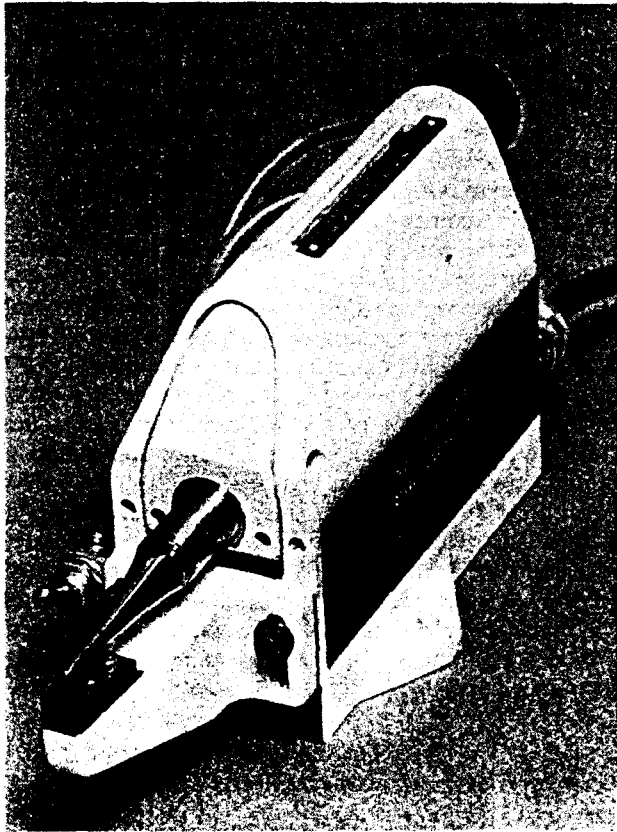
Typical 100 Watt Spot Welding Machine With Lateral Drive System
